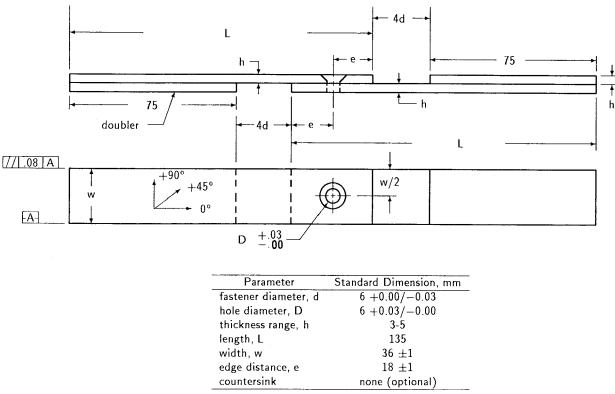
Single-Shear, Single-Fastener Test Specimen Drawing (SI) (See Fig. 7 for details of double-fastener version.)
